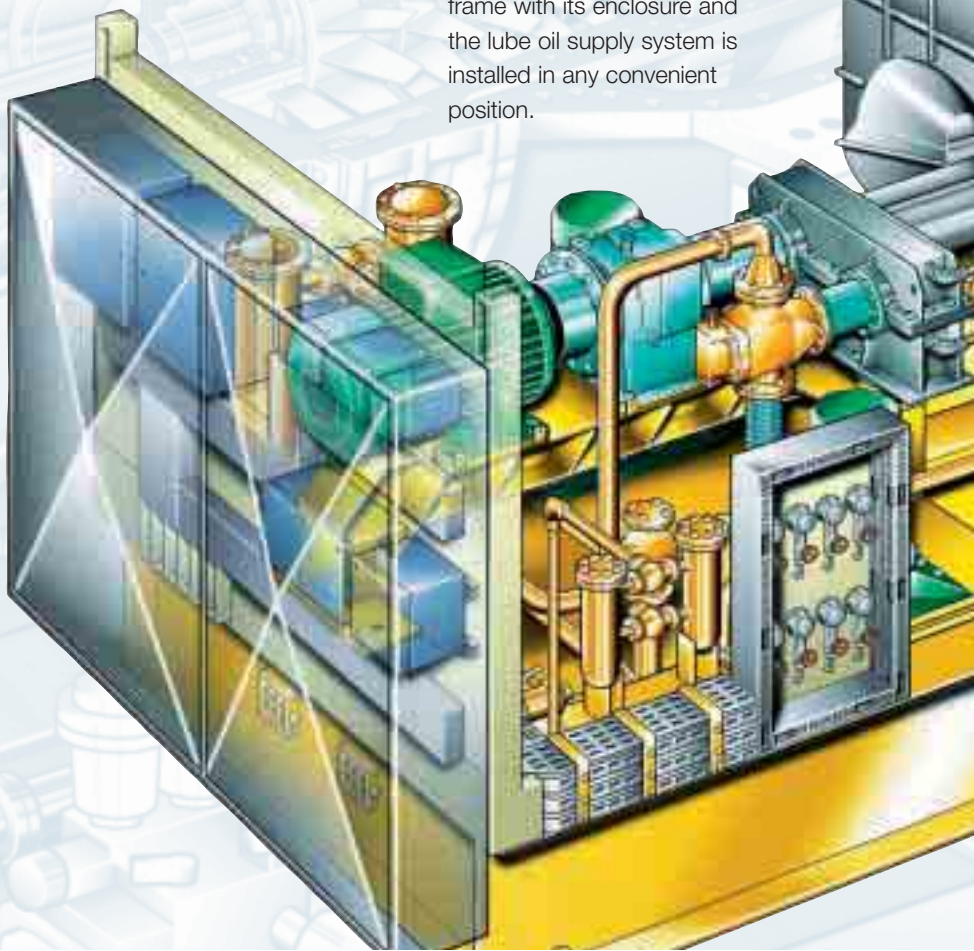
shows the package configuration with a single lift baseframe, fuel plate and gas starter with auxiliary gearbox.
